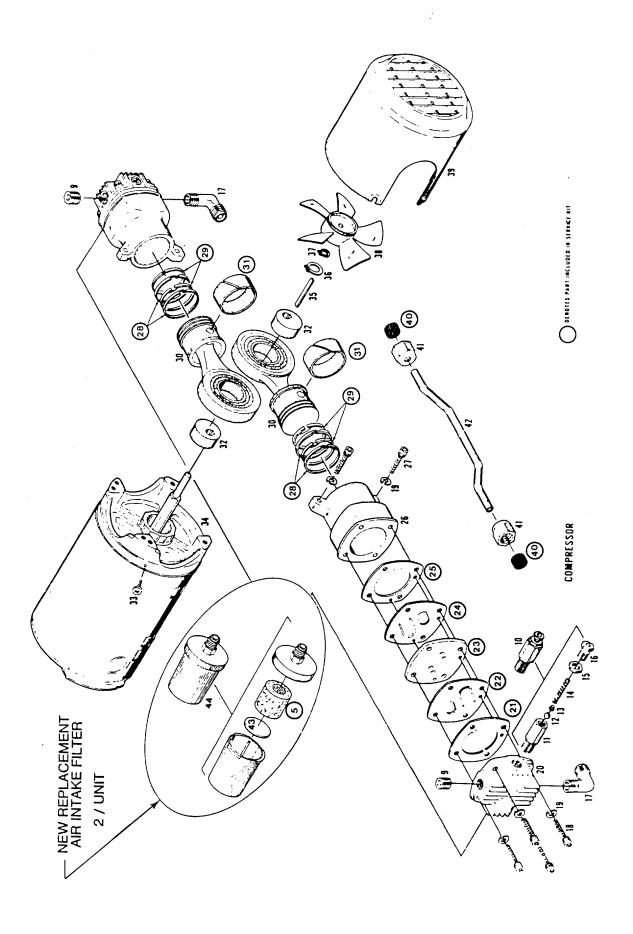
EXPLODED VIEW OF AIR COMPRESSOR AND MOTOR ASSEMBLY
